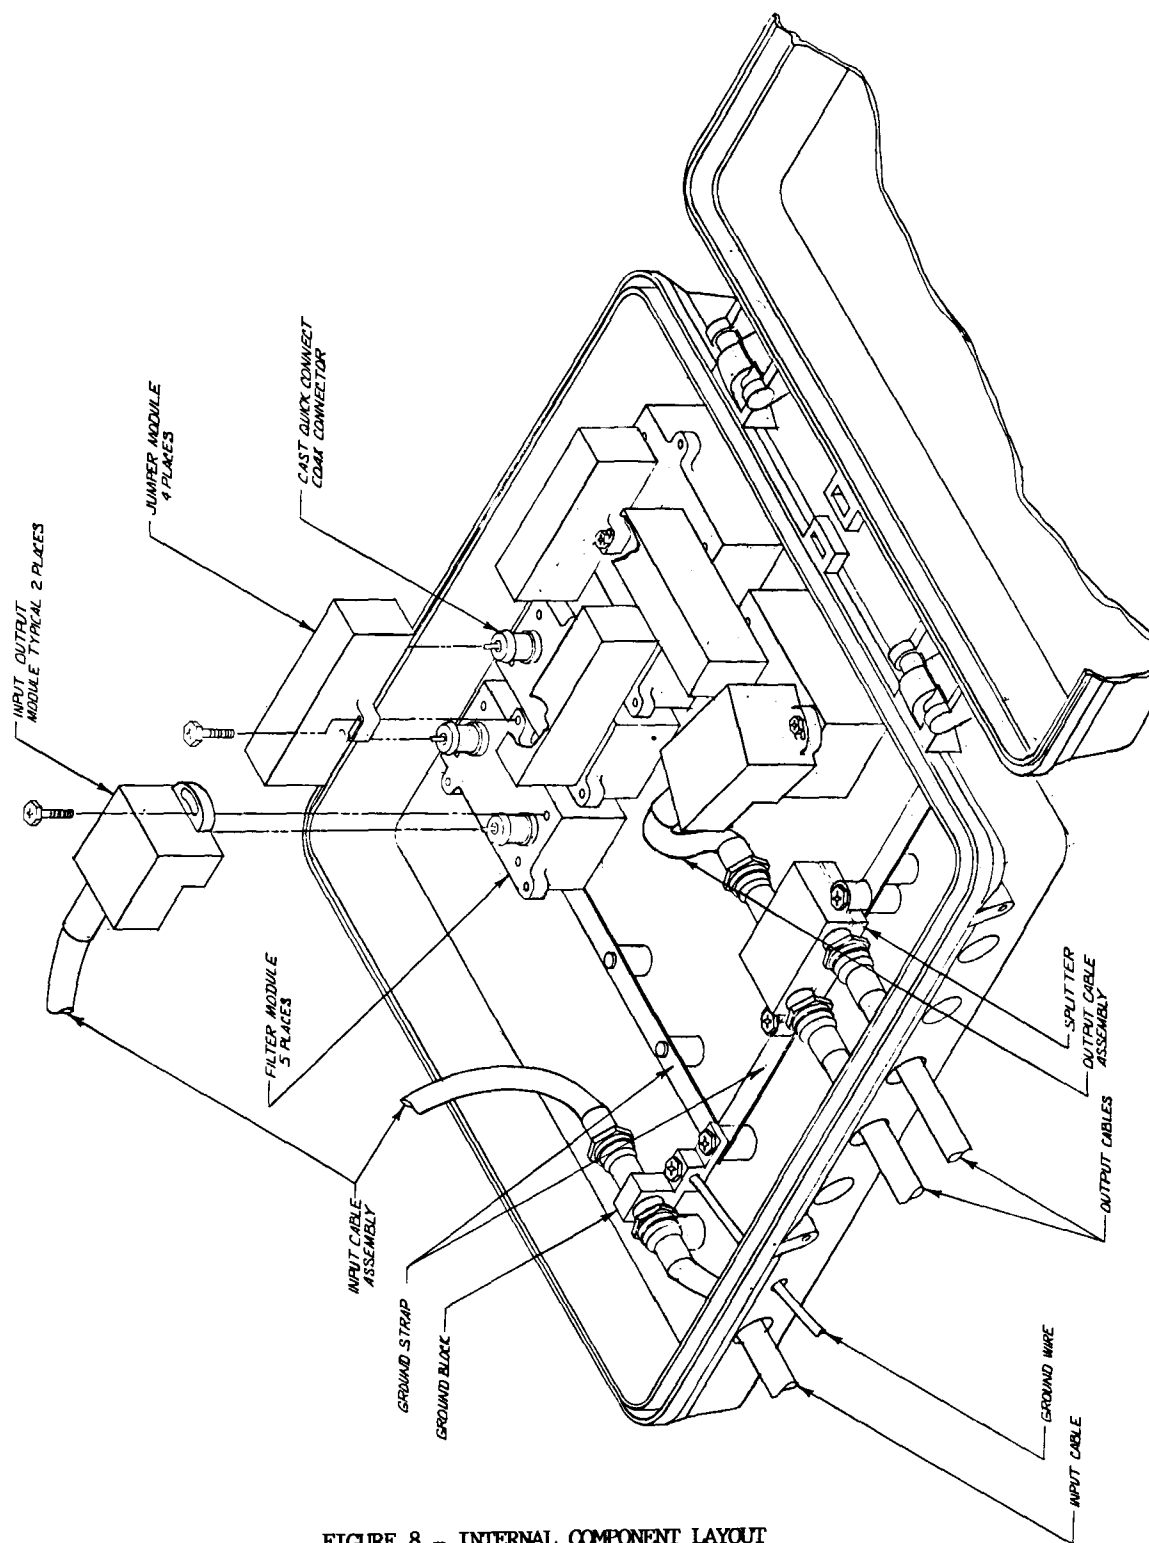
INTERNAL COMPONENT LAYOUT
